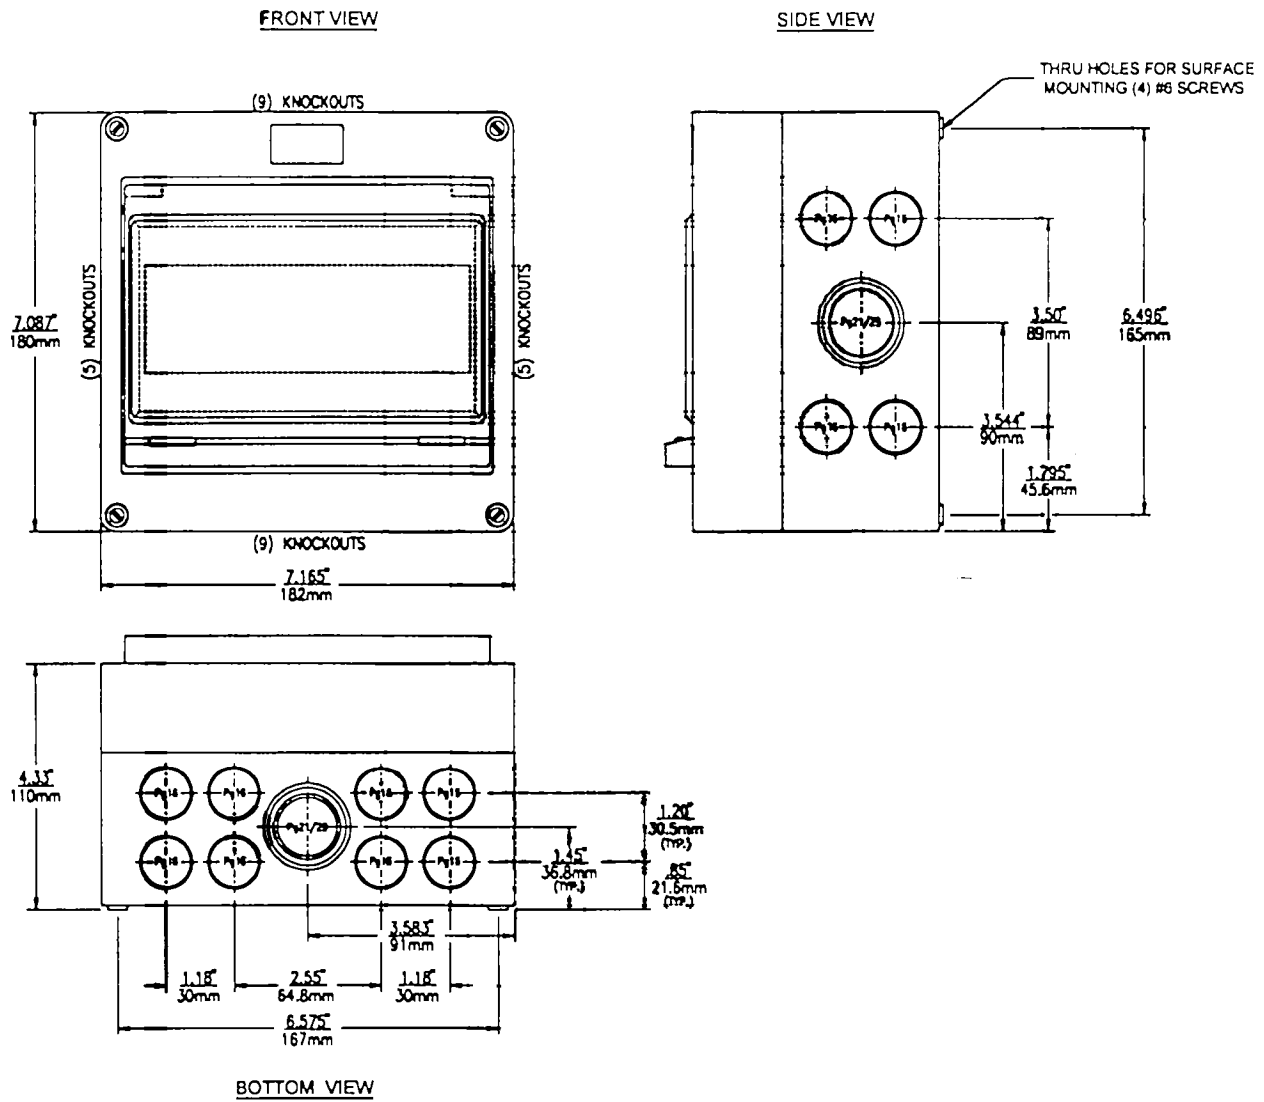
Two Module System Enclosure Dimensions (80-0006R, Rev-A)
